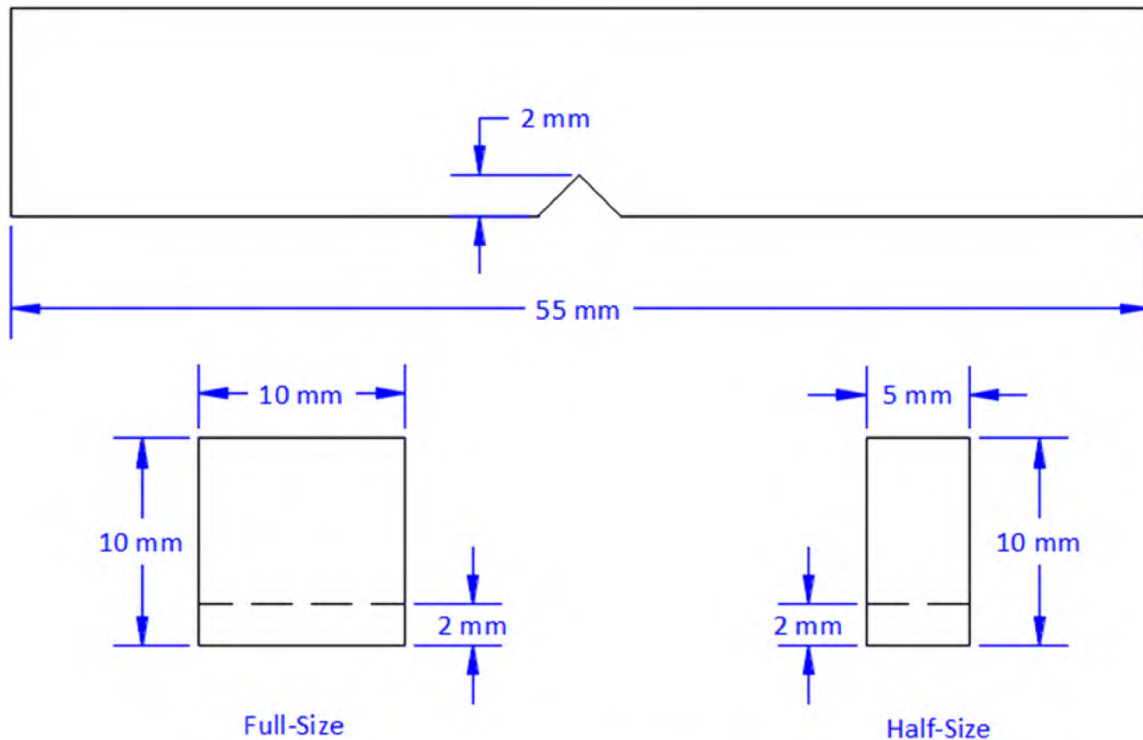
ASTM E23 CVN Specimen Dimensions [86]
